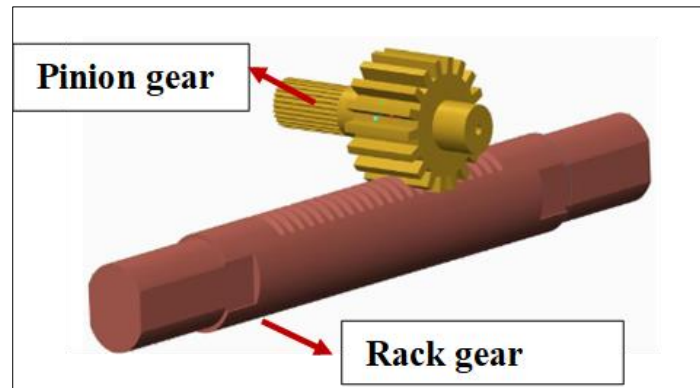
Rack and pinion gear steering system used in the vehicle [8]
